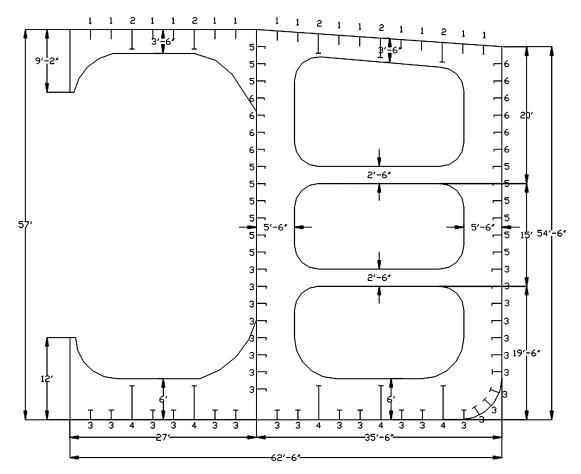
Schematic diagram of tanker vessel showing cross-sectional dimensions (ft and in.) and stiffeners type codes (1.00 ft = 0.31 m)
